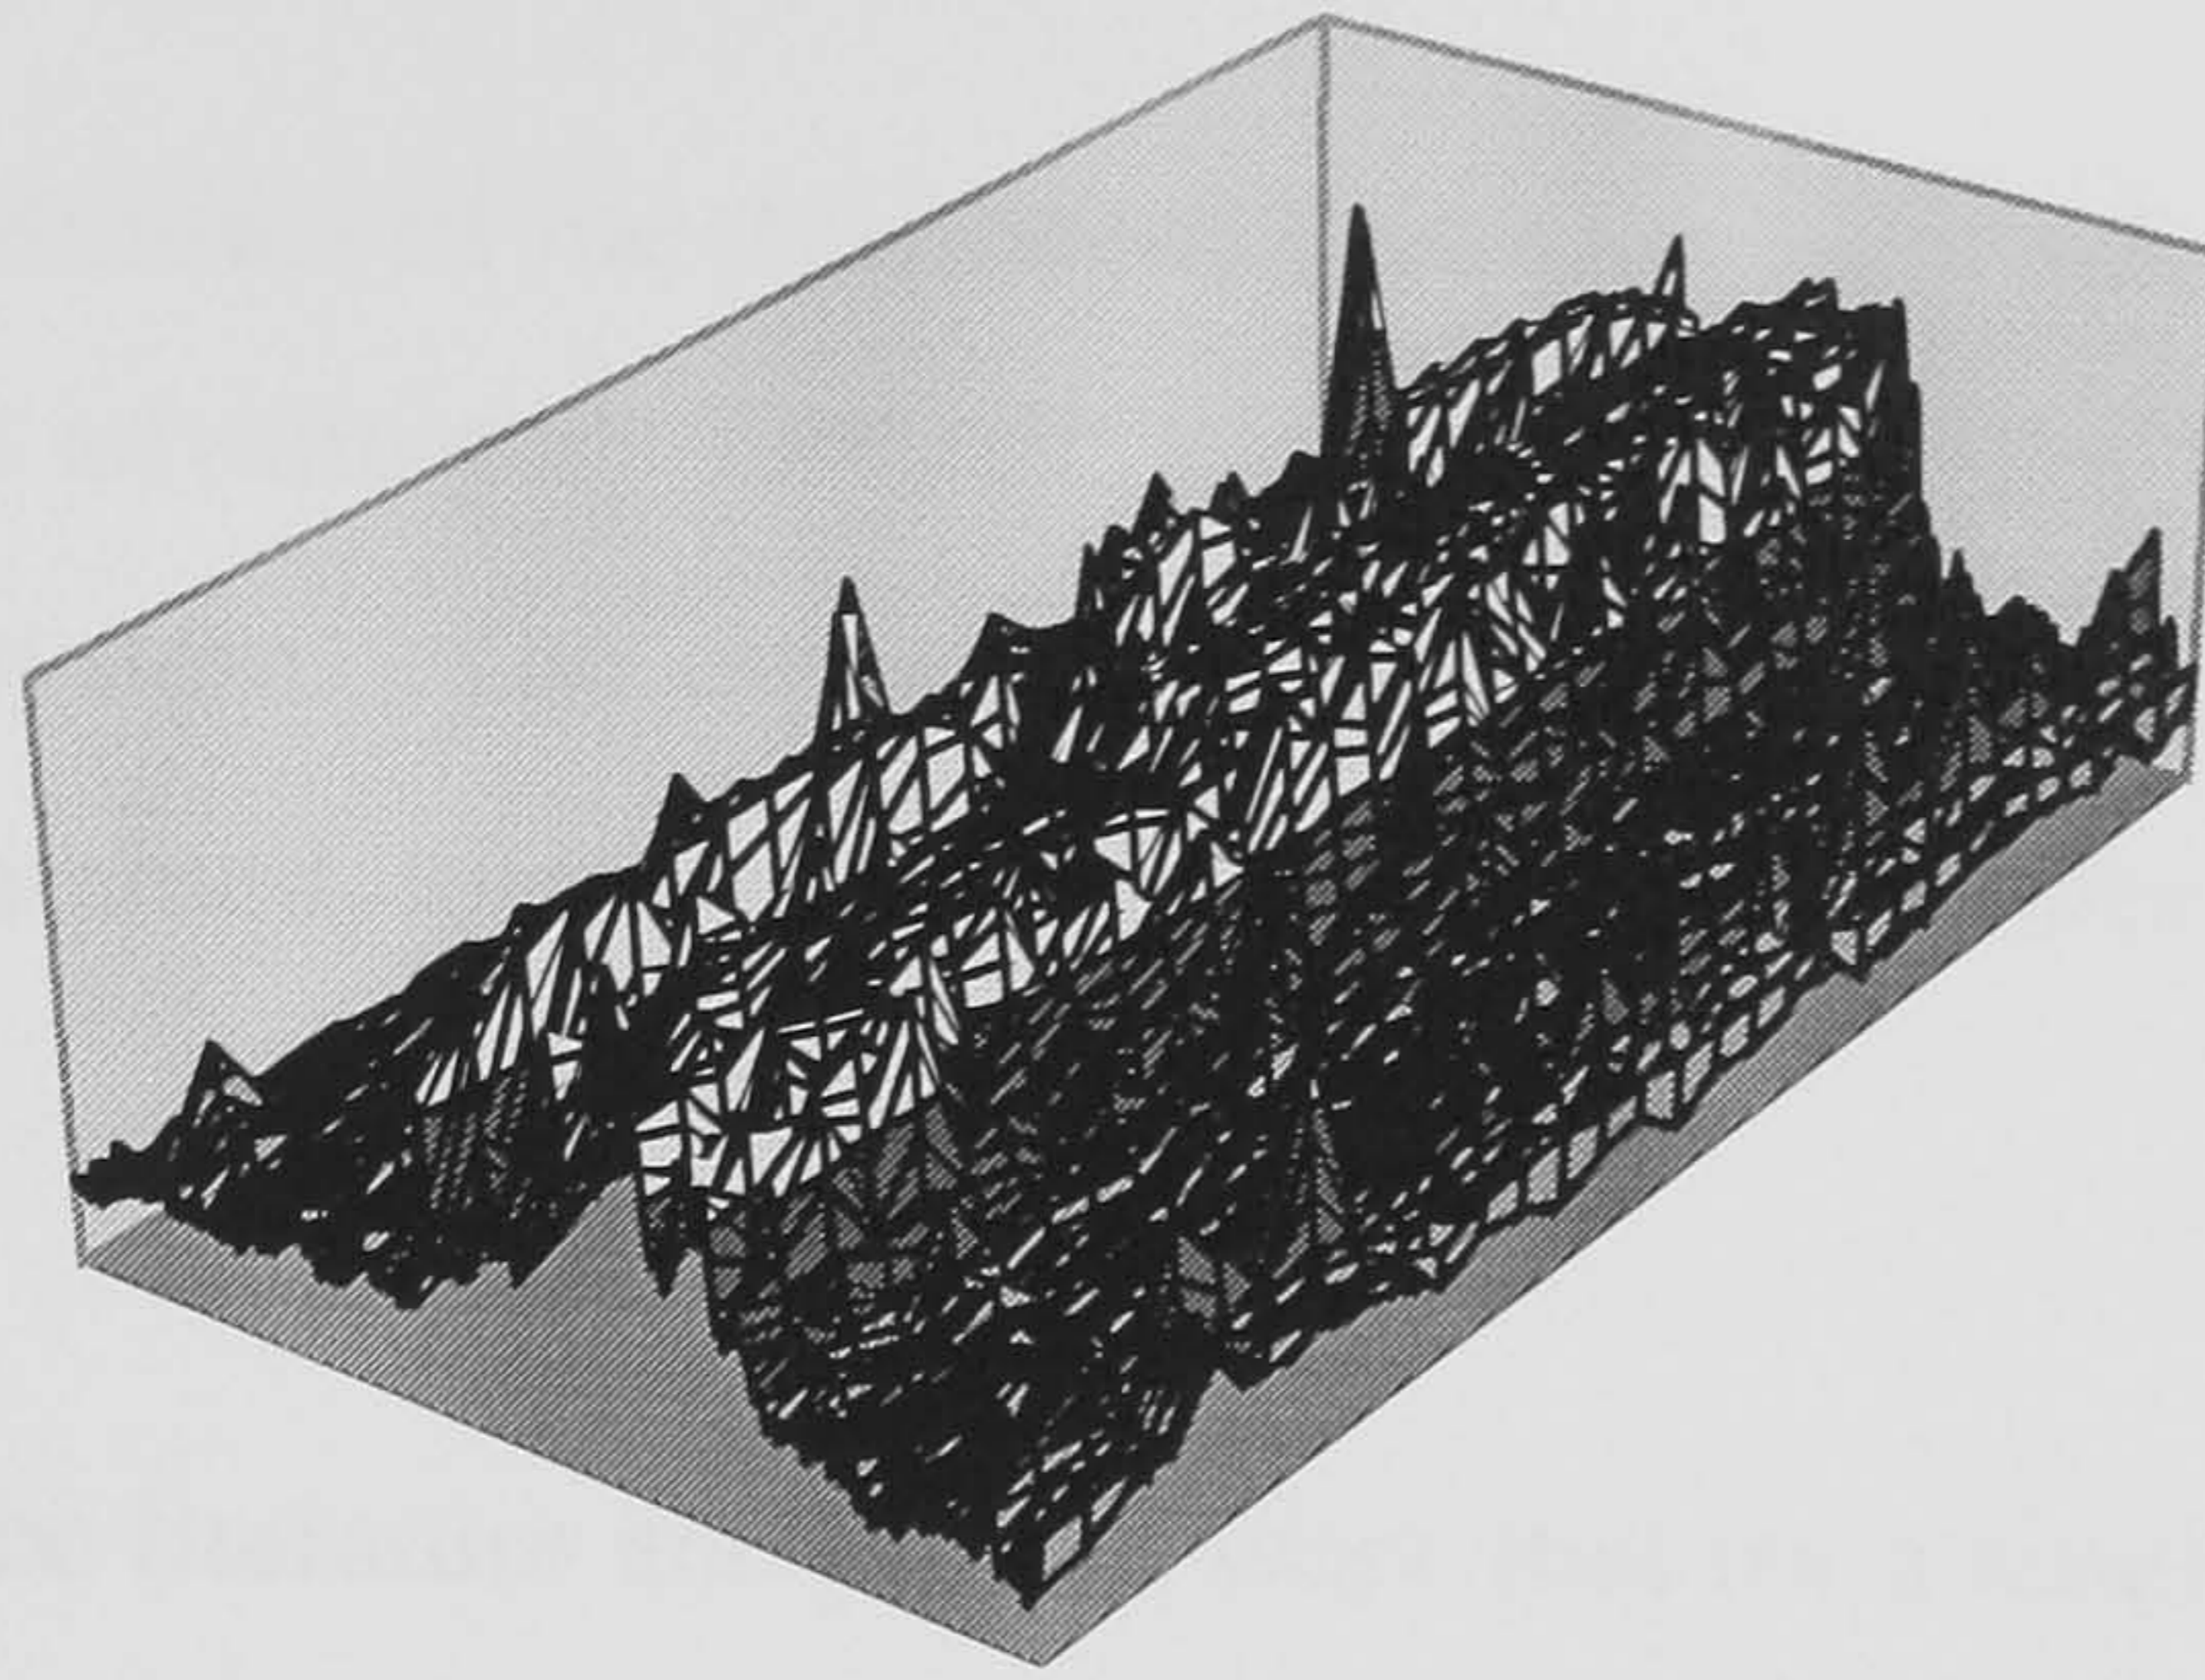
(a) shows the 3-D scan of the weld bead formation for 30° welding geometry
